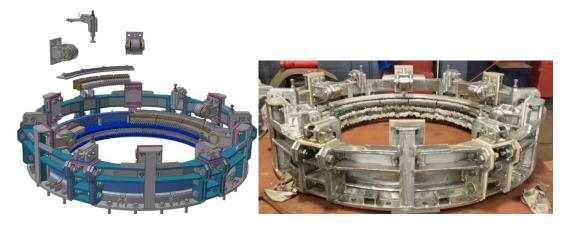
Assembly view exploded for maintenance and corresponding shop assembly photograph
